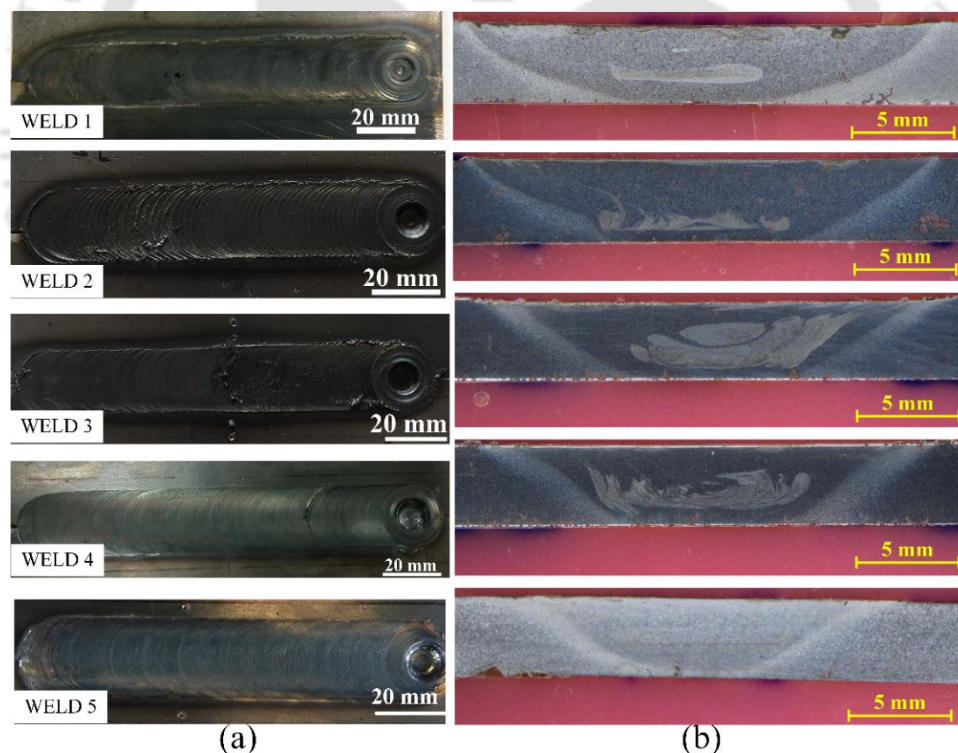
(a) Visual appearance of the welded joints, and (b) macrograph of the transverse cross-section of the welded samples
